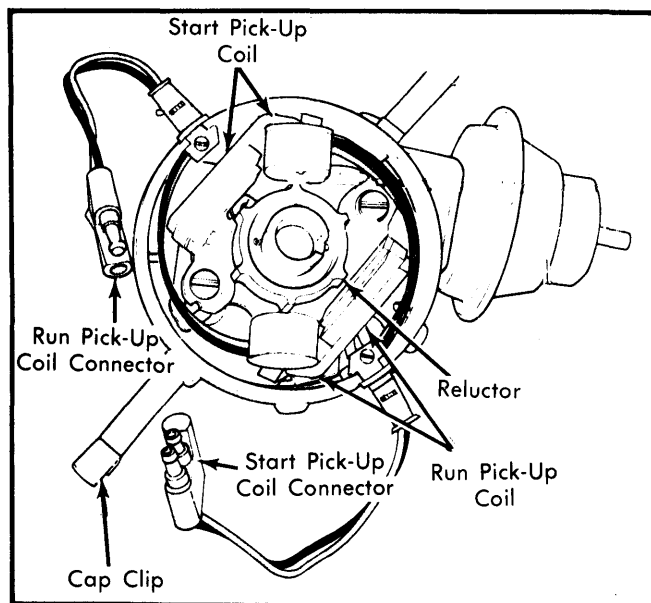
View of Distributor, with Cap & Rotor Removed, Showing Location of Magnetic Pick-Up Coil Assembly
